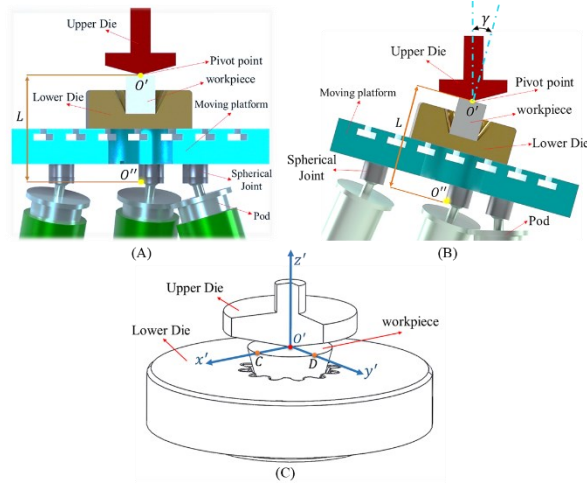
((A) And (B))-the configuration of the hexapod rotary forging machine, (C)-workpiece contacting with the upper die at the pivot point.
